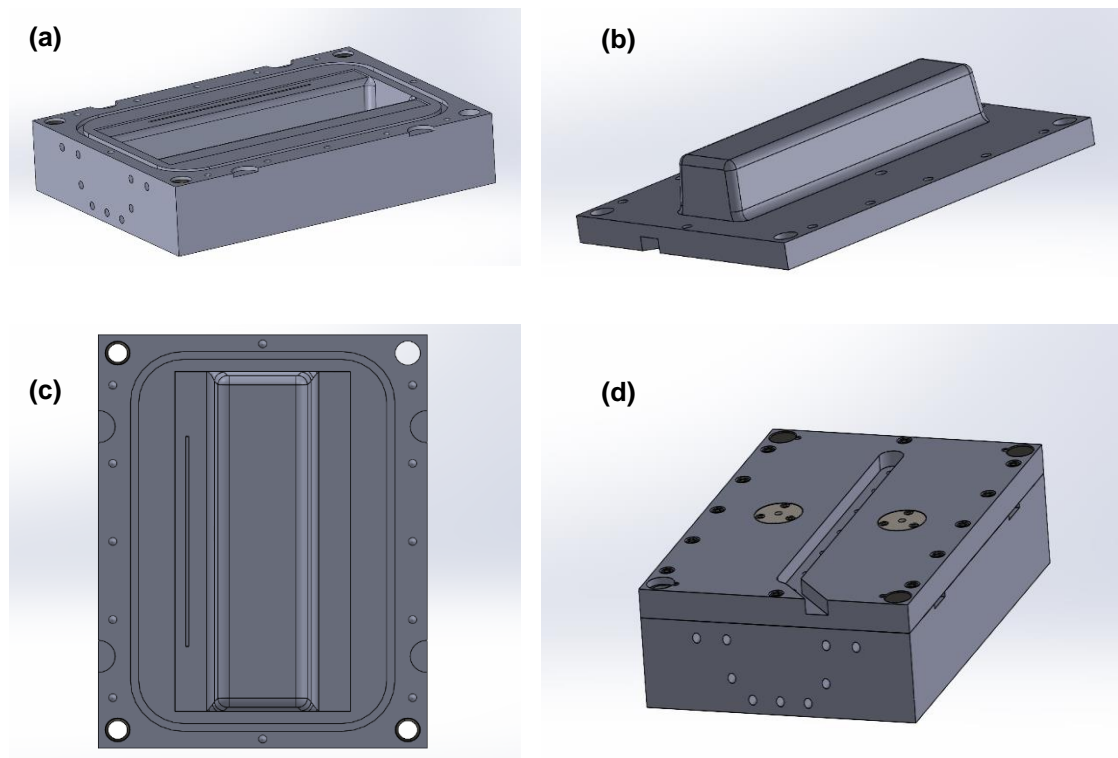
Mould geometry (a) Lower part; (b) upper part; (c) detail lower part and (d) general view.
